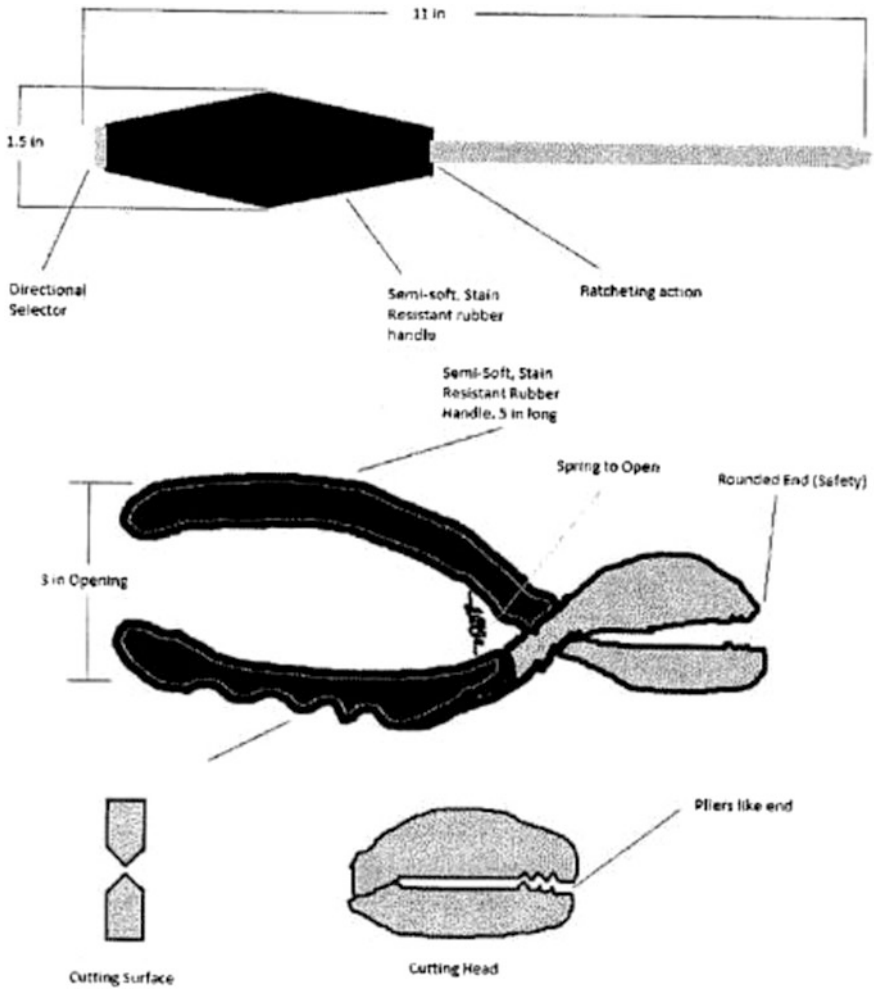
Set 4 screwdriver redesign and wire cutter redesign
